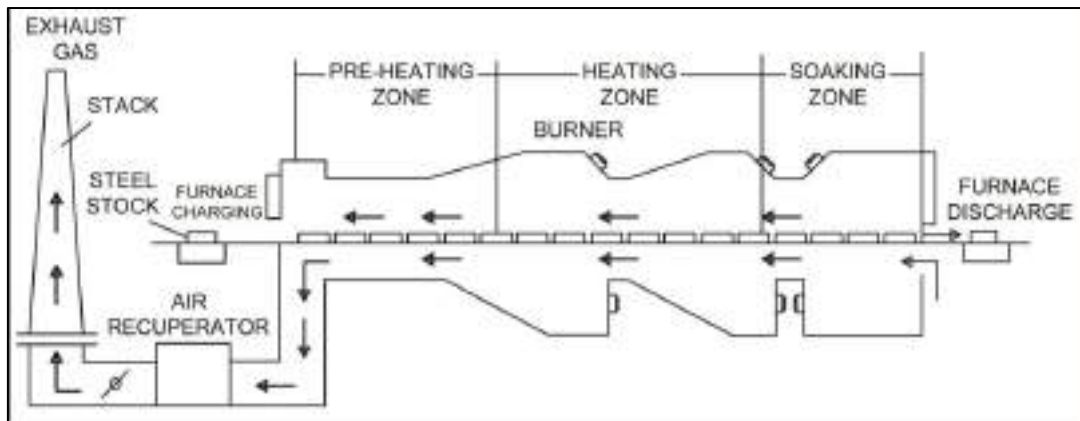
Typical Longitudinal Section of a Reheating Furnace
